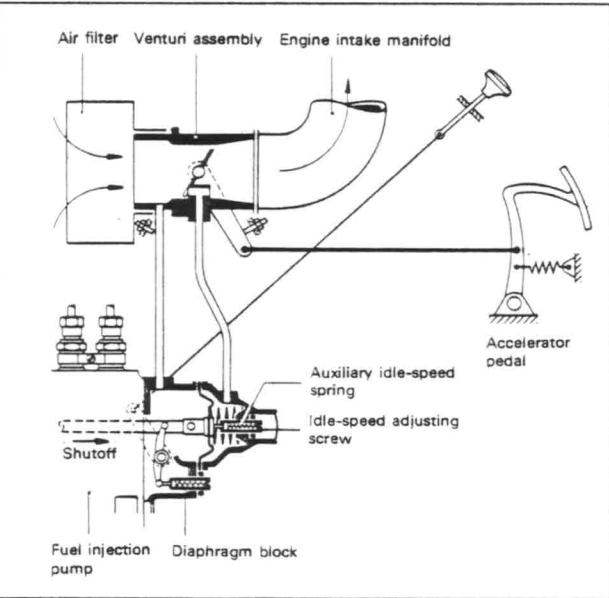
Diaphragm block EP MZ 60 A (with auxiliary spring), adjusting screw inside, adjustable from outside.
